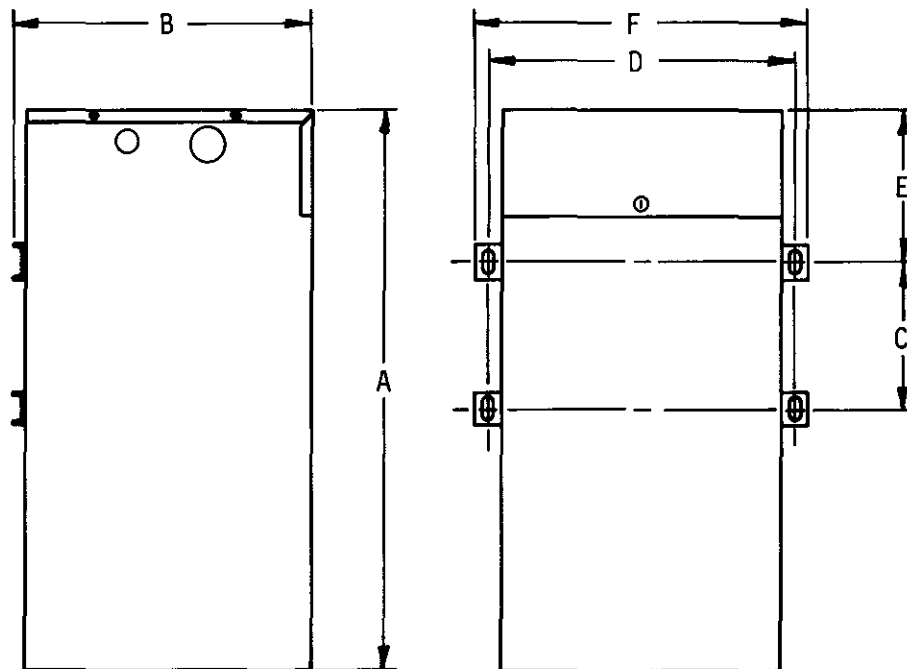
POWER CONDITIONER DIMENSIONAL DRAWINGS
